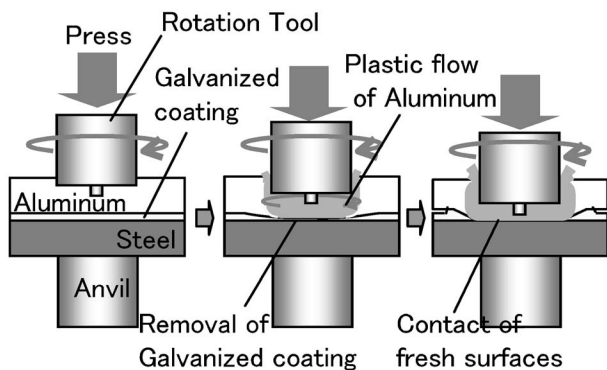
Schematic representation of spot friction welding of aluminum to steel.
